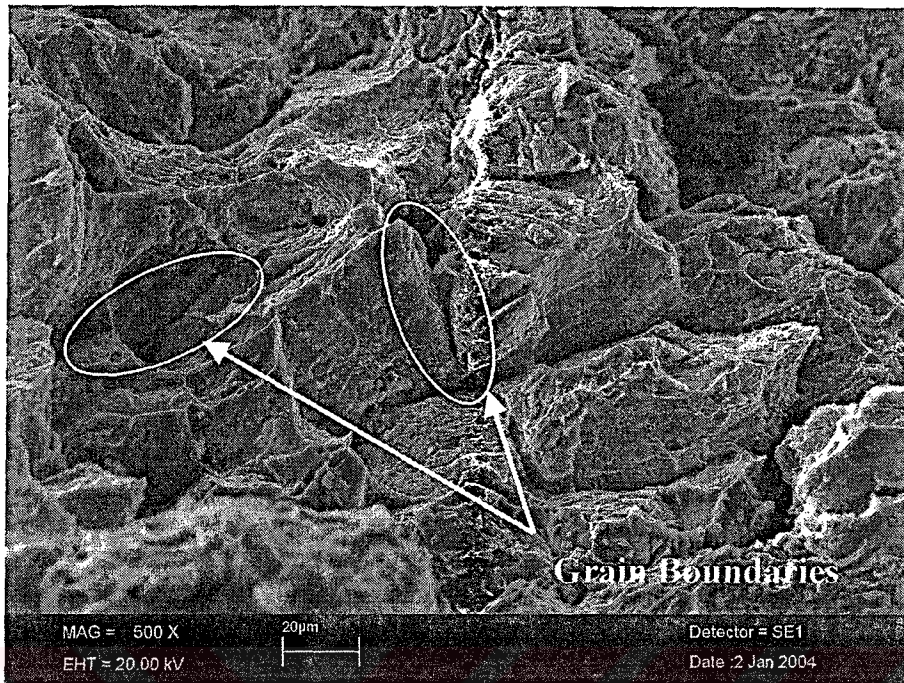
20 minutes, 640 °C sintered Al part for 400 MPa
